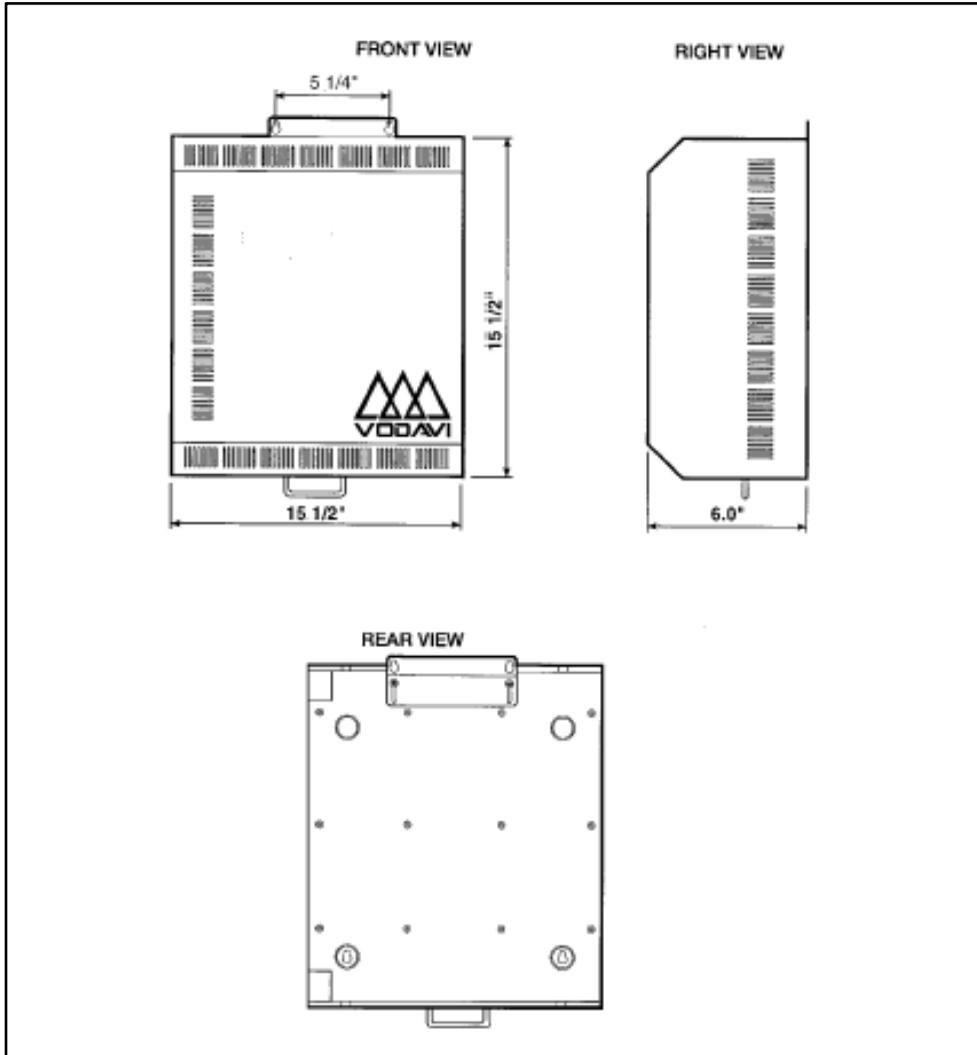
Triad 1* KSU Mounting Holes and Installation Layout
